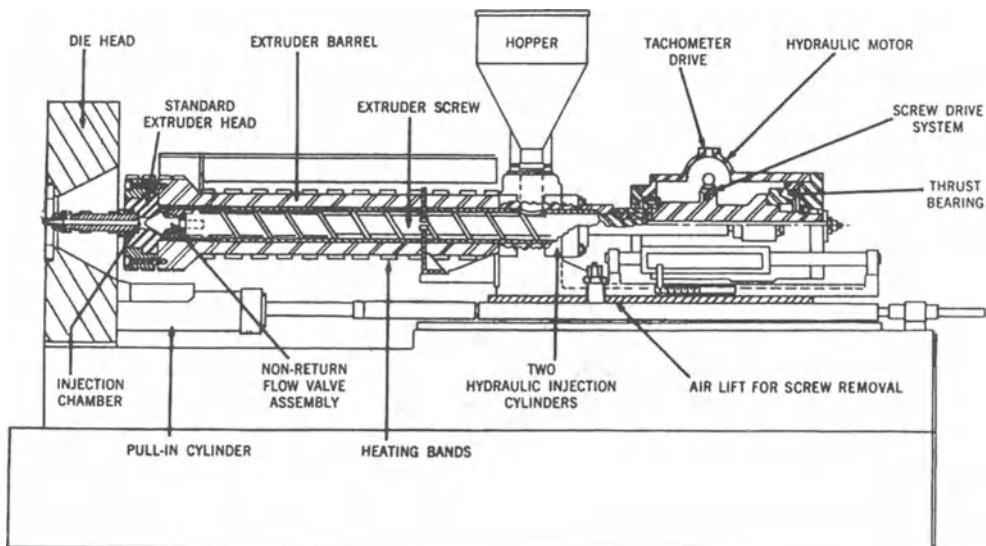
In-line reciprocating screw unit with hydraulic drive schematic.
